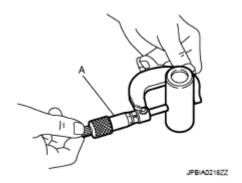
Measuring Outer Diameter Of Piston Pin Courtesy of NISSAN MOTOR CO., U.S.A.
